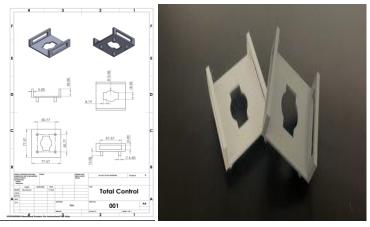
Drawing showing the original button peg design (left) PRUSA printed designs of the original button peg model (right).
